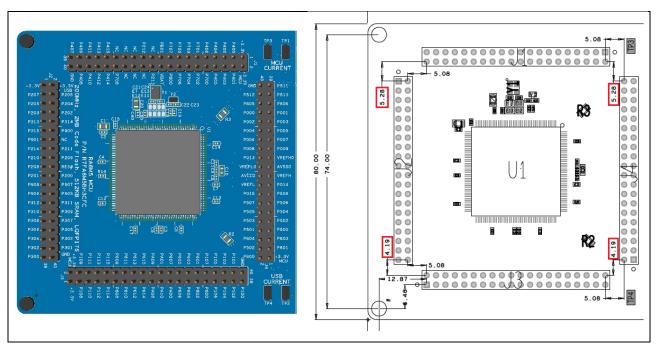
Breakout Pin Headers J1, J2, J3, J4
